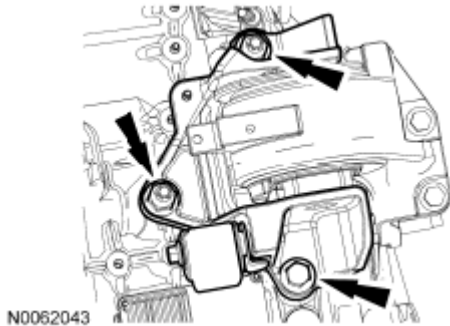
Locating Transaxle Support Insulator Bracket, Bolt & Nuts
